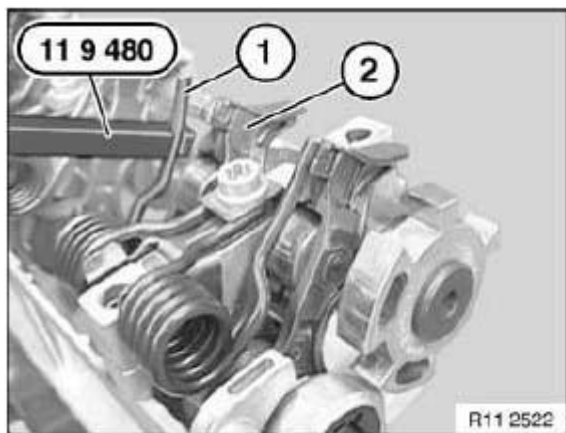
Identifying Torsion Spring And Intermediate Lever
